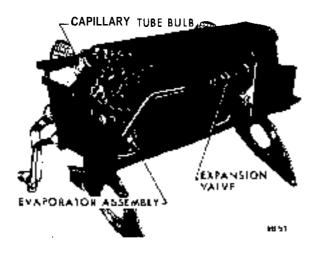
B-95 Evaporator and Expansion Valve Assembly GT
